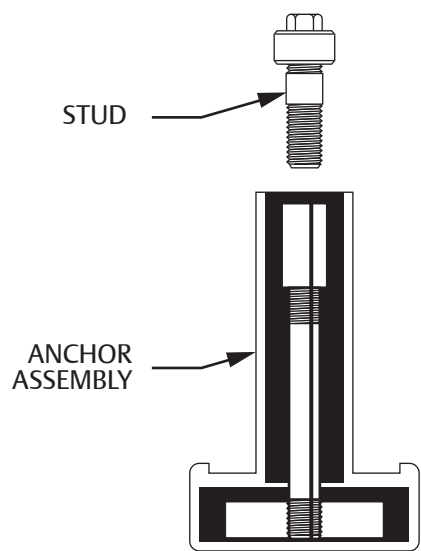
Standard Supplied Anchor Bolt Assembly
